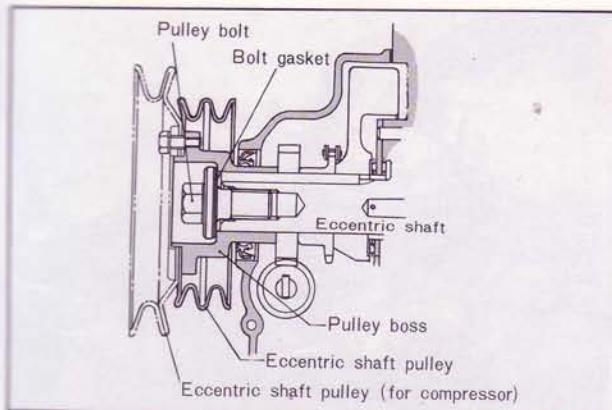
Eccentric shaft pulley and pulley bolt
